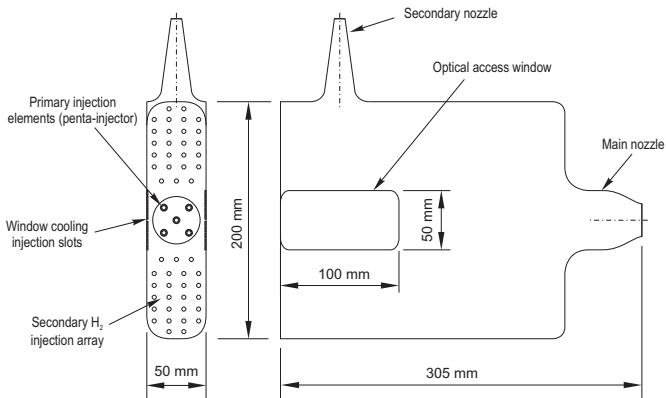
BKH section and injection plane with relevant dimensions[86]
